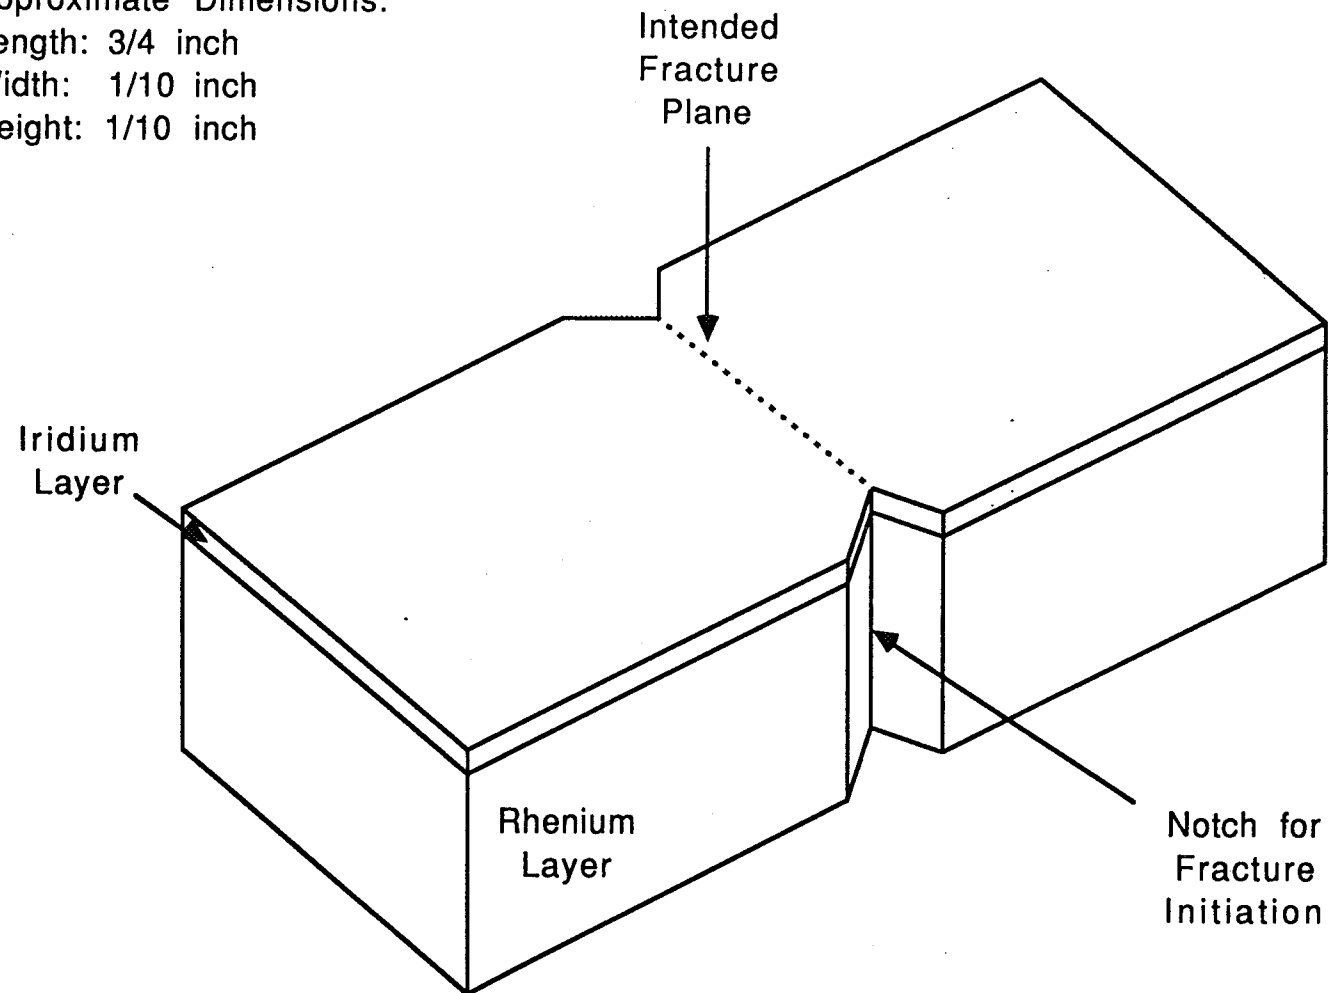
Geometry and Approximate Dimensions for Fracture Sample
